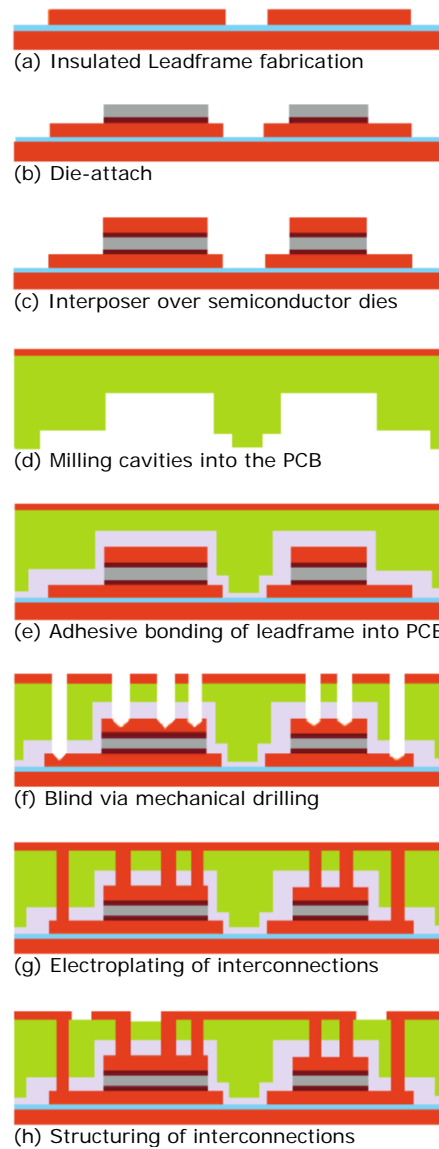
The manufacturing process flow of the embedding technology using mechanical drilling with copper interposers [27].
